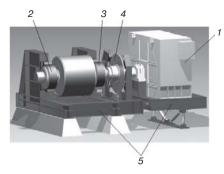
Drive model of a belt conveyor equipped with a synchronous drive with one external bearing:
